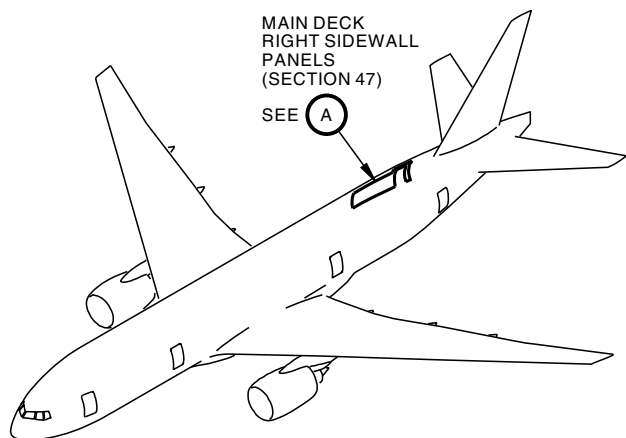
SUB-MAJOR ZONE 242 PASSENGER SIDEWALL PANELS
